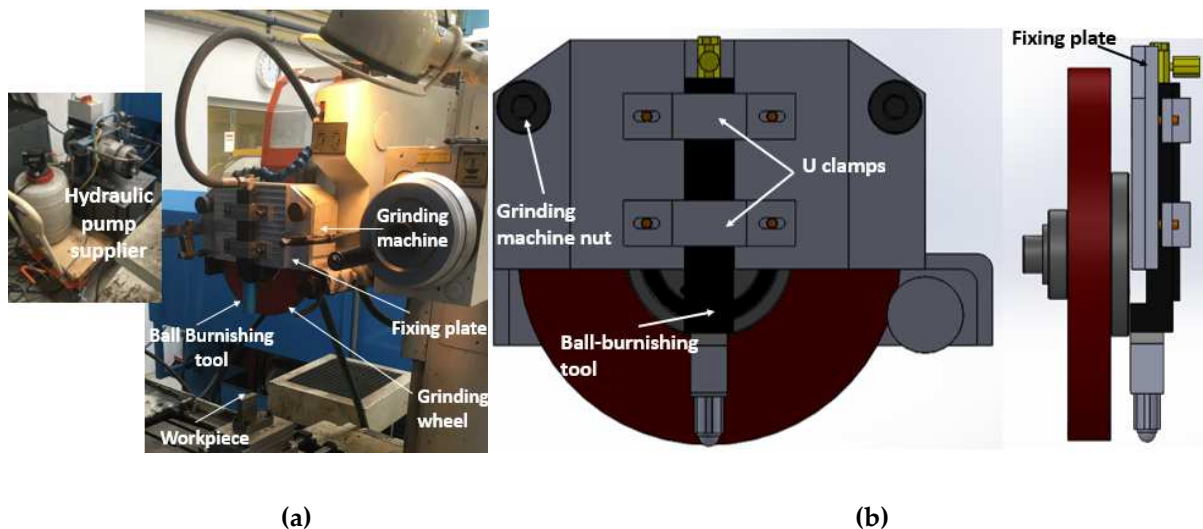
(a) Combined grinding/ball-burnishing setup; (b) SOLIDWORKS CAD front and side views of the burnishing tool assembly.
